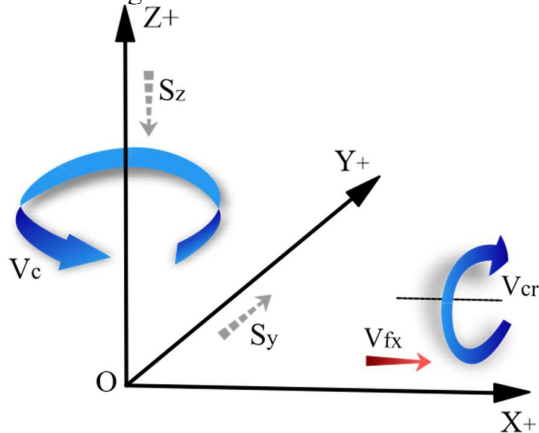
Unconventional tangential cutting scheme realized on CNC milling machine
